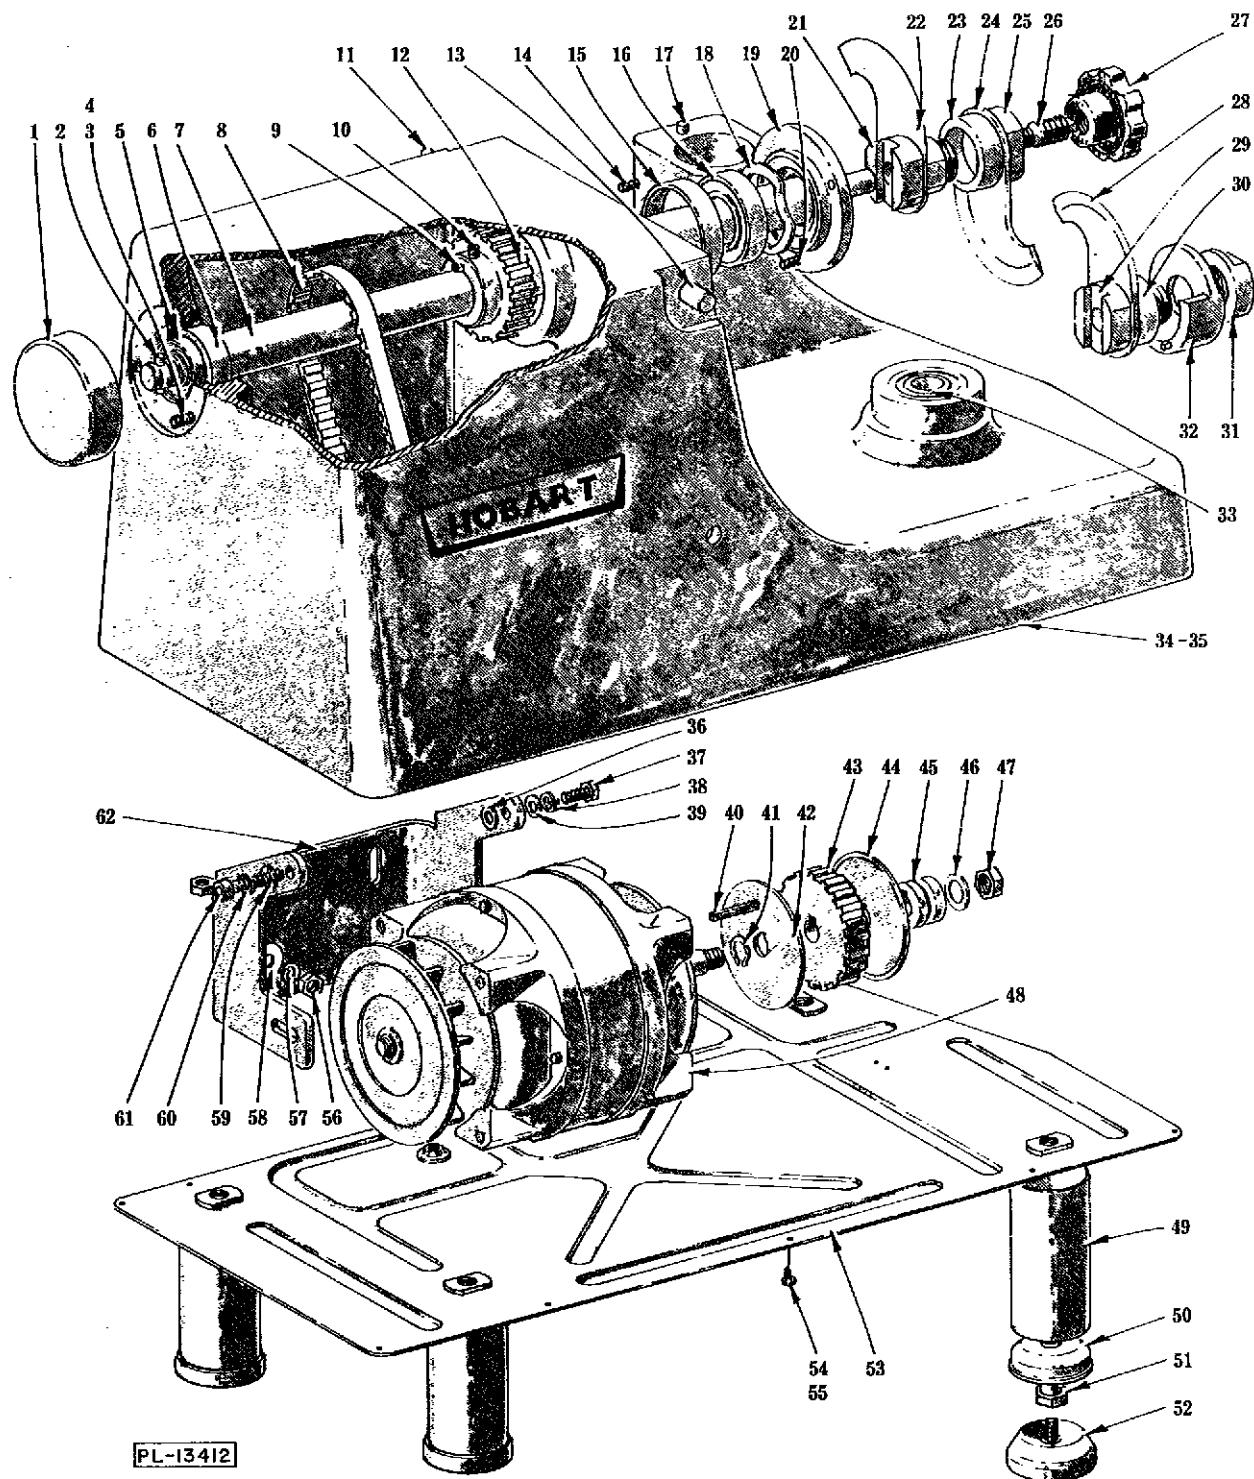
Motor and Base Unit (Sheet 1 of 2)
